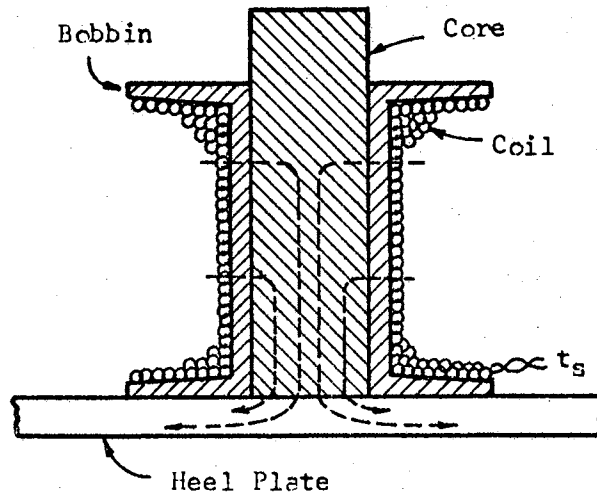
Coil-Core Assembly of Rotary-Type Relay
